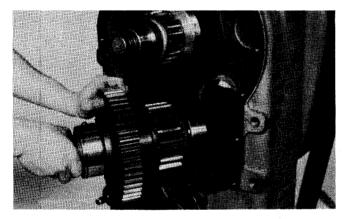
A 6 & 8 speed idler shaft, gear and bearing assembly. NOTE: Do not lose rear bearing lock ball.
